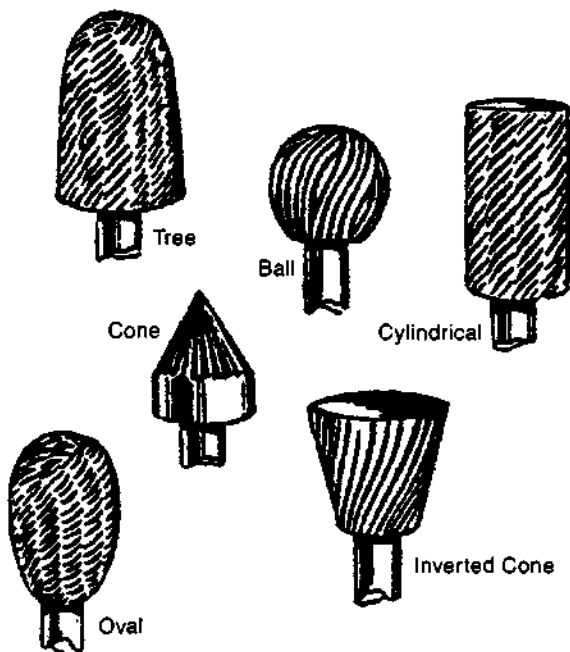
L1 Typical head shapes of burrs and rotary files. (Both rotary files and burrs have cutting teeth. The teeth of rotary files are made by upsetting the tool surface with sharp forming tools; the teeth on burrs are made by grinding.) (from LeGrand, *American Machinists Handbook*, 1955, McGraw-Hill Companies. Reproduced with permission.)
